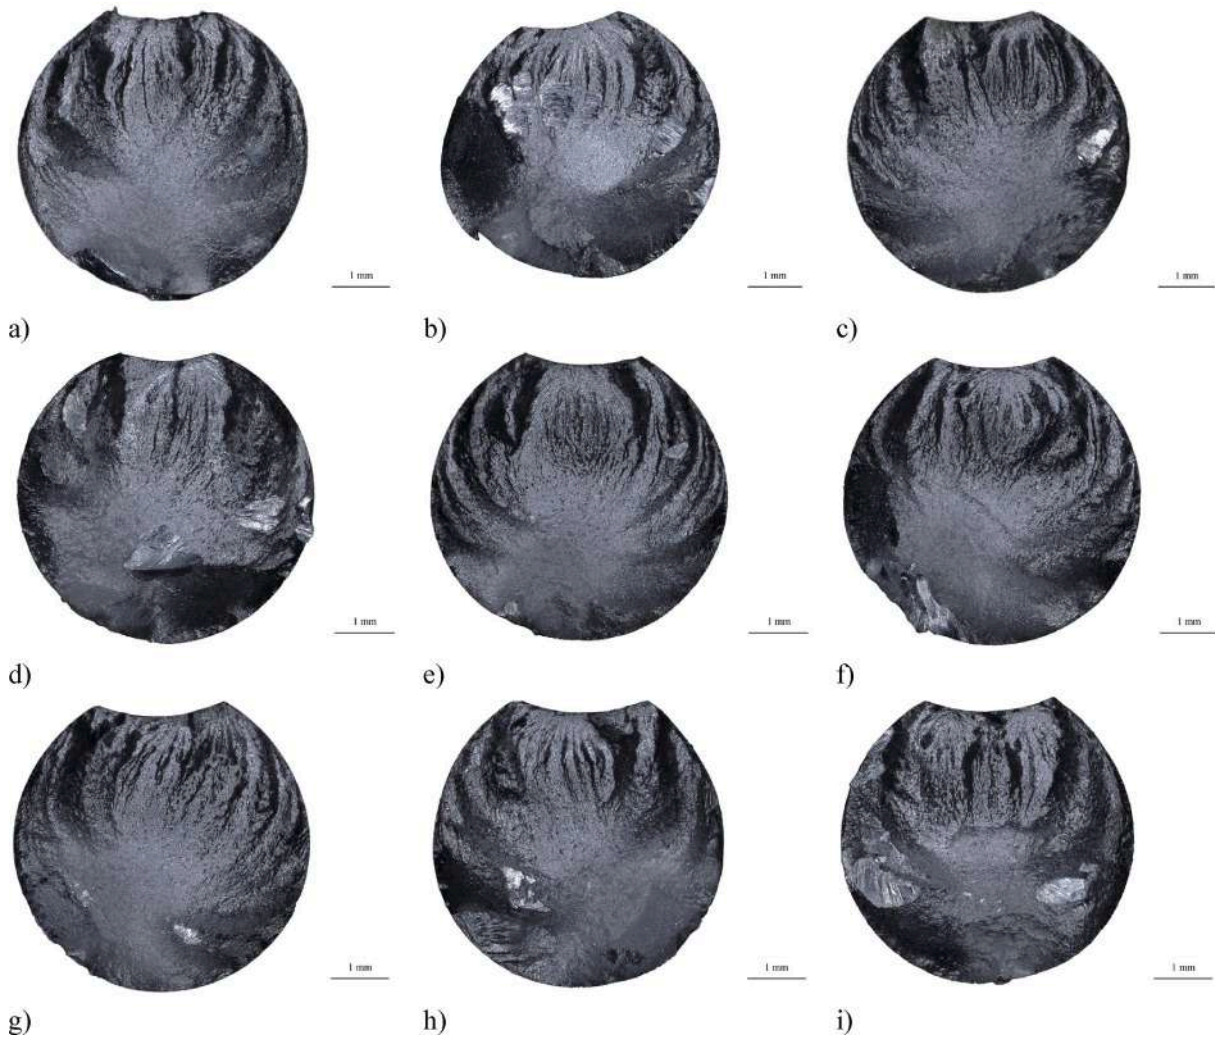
Fracture surfaces of the tested specimens: a) Specimen 1; b) Specimen 2; c) Specimen 3; d) Specimen 4; e) Specimen 5; f) Specimen 6; g) Specimen 7; h) Specimen 8; i) Specimen 9.
